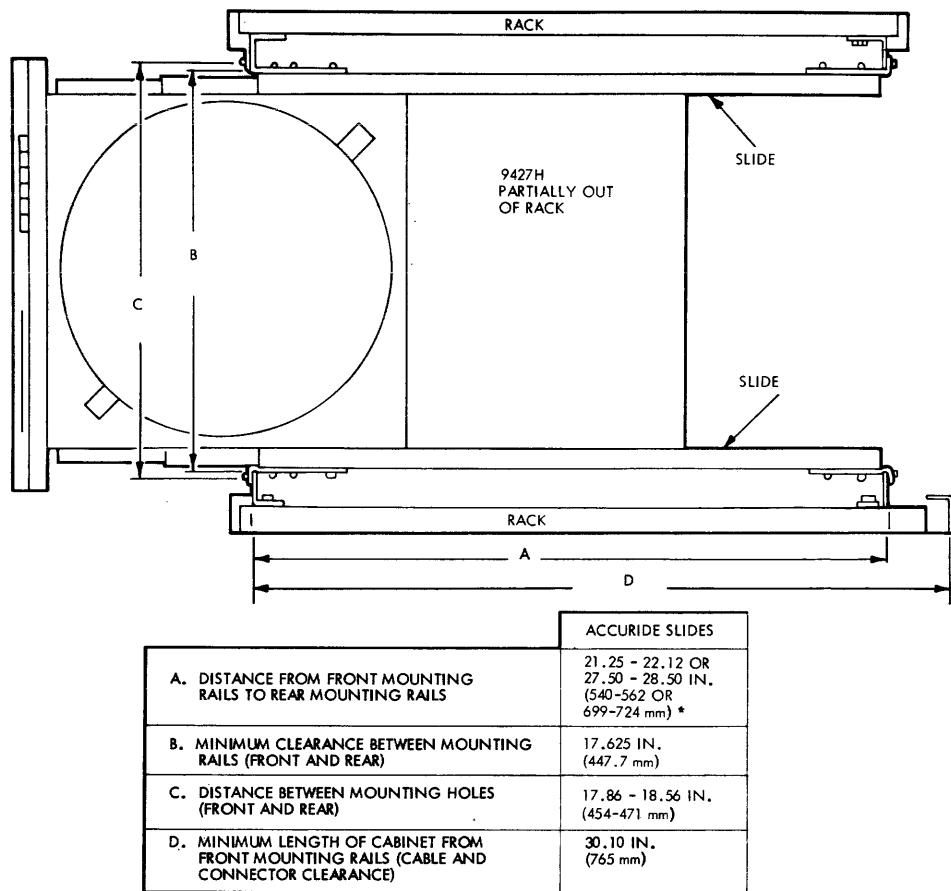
RACK MOUNT UNIT OVERALL DIMENSIONS
